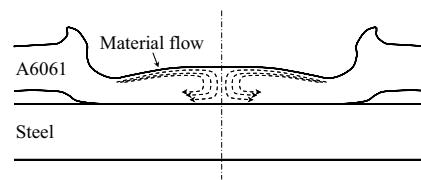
Schematic illustration of material flow under the tool in dissimilar weld
